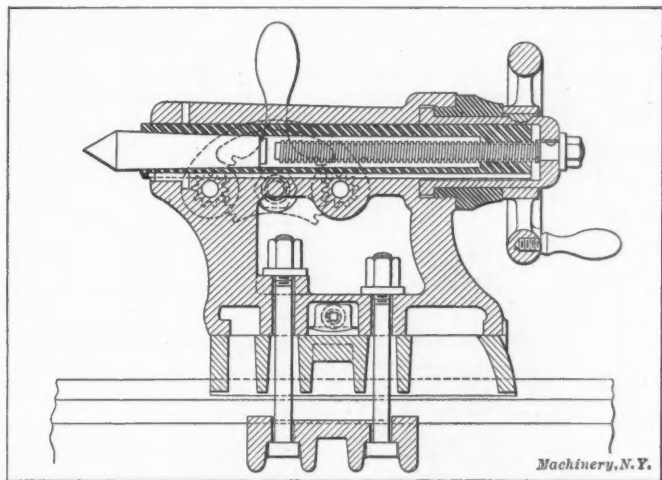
Sectional View of Tailstock showing Method of Clamping and Spindle Construction
